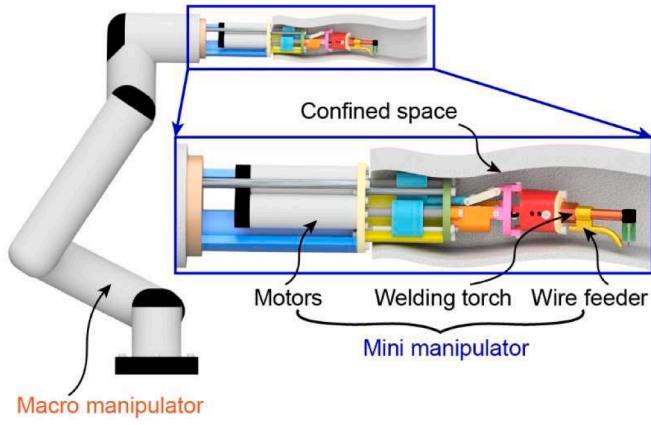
A general concept of the collaborative manipulator which consists of a macro manipulator and mini manipulator is proposed to access a confined environment and accomplish machining tasks (e.g., welding). For the slim mini manipulator, an extra 2-DoF is enabled to the end-effector (e.g., welding torch) for access to confined spaces without collision. The macro manipulator not only provides large-scale movement for the collaborative welding system but also offers compensation for the movement of the slim mini manipulator.
